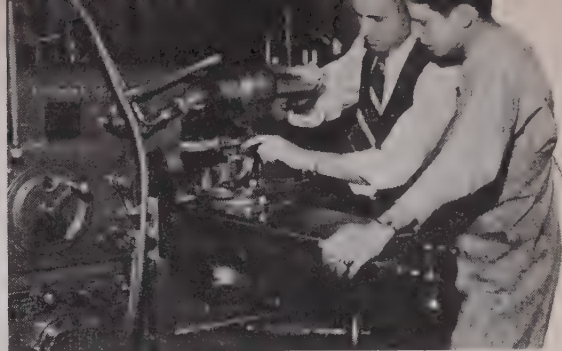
A Talon tool and die maker apprentice being shown how to mill a form on a blanking punch.
